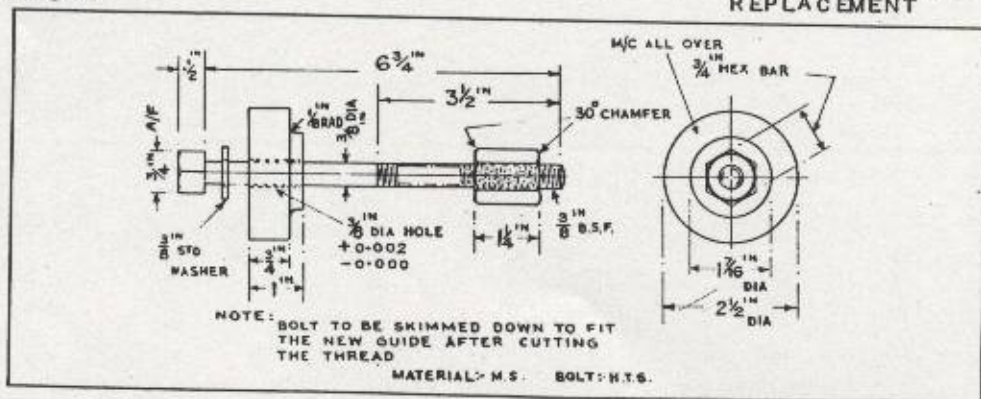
TOOL, REPLACING, EXHAUST VALVE GUIDES (LOCAL MANUFACTURE)
